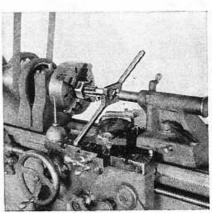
Tapping a Large Nut on a South Bend Lathe
